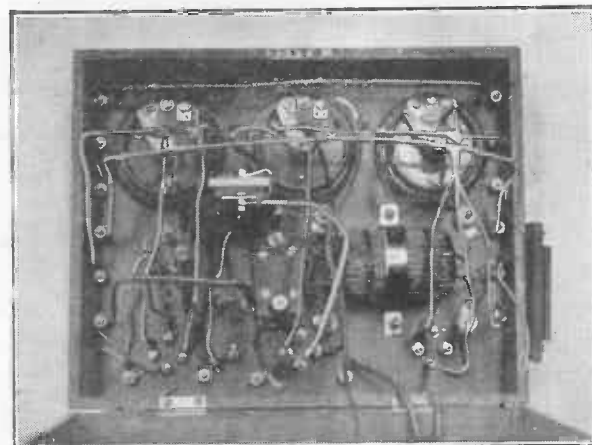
Photograph of Back of Panel showing Wiring.
